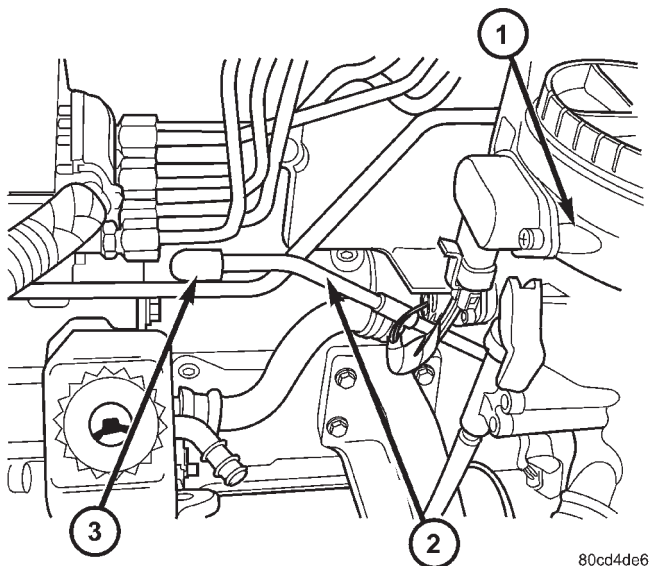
CAPPING OFF FUEL FILTER OUTLET LINE
